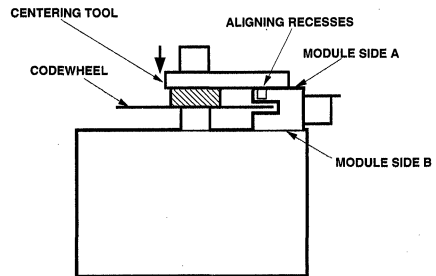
Alignment Tool is Placed over Shaft and onto Codewheel Hub. Alignment Tool Pins Mate with Aligning Recesses on Module.
